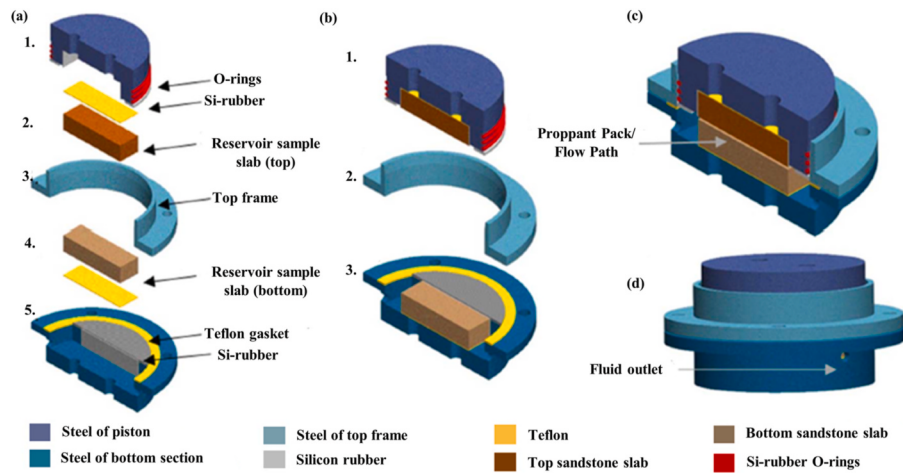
Central cell assembly (a) exploded cross-sectional view 1. Piston 2. Top rectangular slab of reservoir rock 3. Frame 4. Bottom rectangular slab 5. Bottom section, (b) cross-sectional view 1. Piston with top slab 2. Top frame 3. Bottom Section with lower, (c) Cross-sectional view of assembled central cell, (d) Central cell (Shekhawat and Pathak, 2016).
